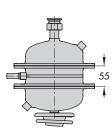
Dimensions · Type 2422 Valve balanced by a diaphragm
